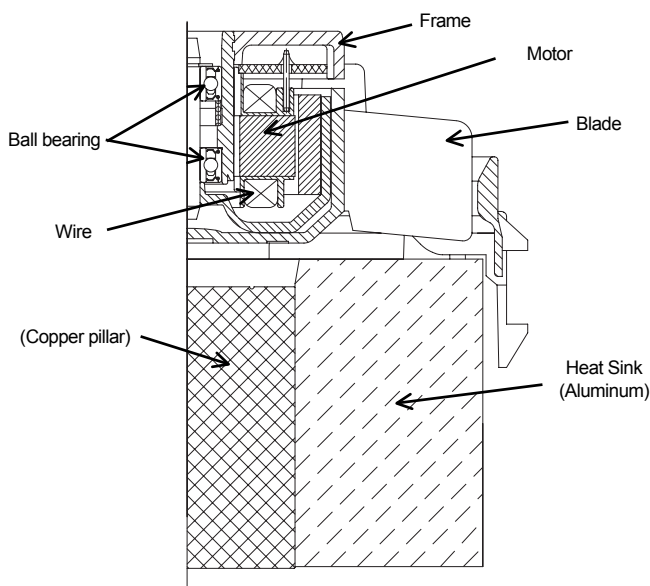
Structure Drawing of "SAN ACE MC" for Pentium®4
